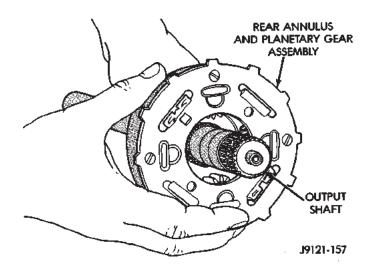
Installing Rear Annulus And Planetary On Output Shaft
